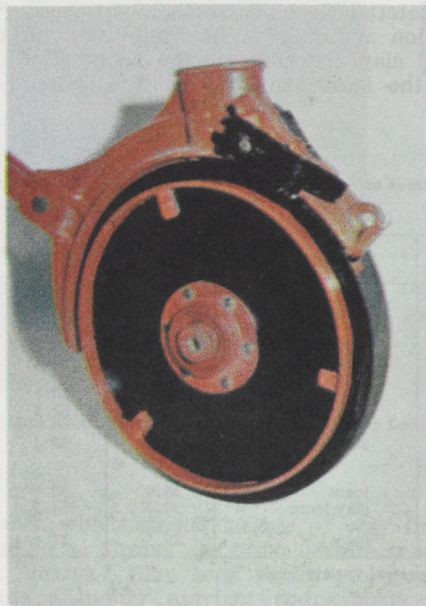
A flange ring spot welded to drill disc for depth control
